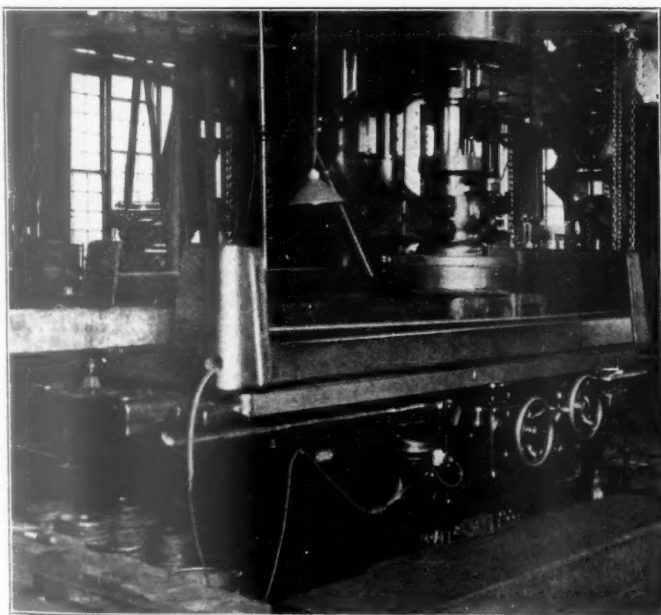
Surface Grinder Used in Finishing Main Rod Sides
